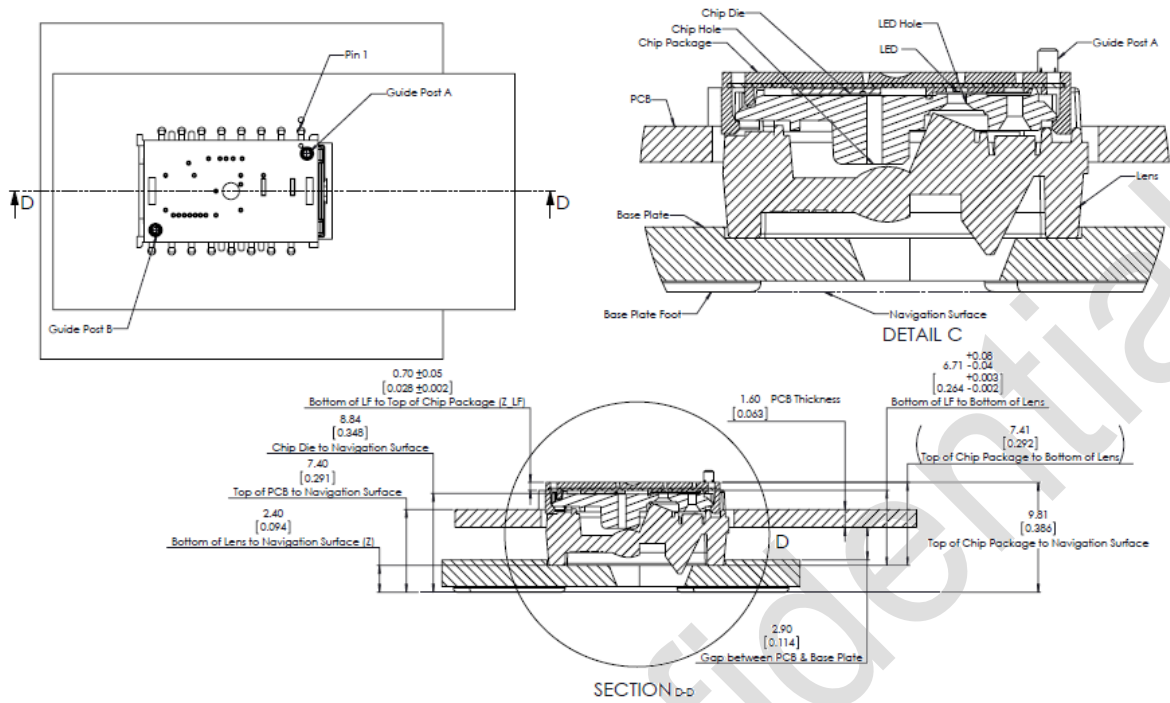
Assembly drawing of PAW3399DM-T4QU and distance from LOAE-LSI1 lens reference plane to tracking surface (Z)
